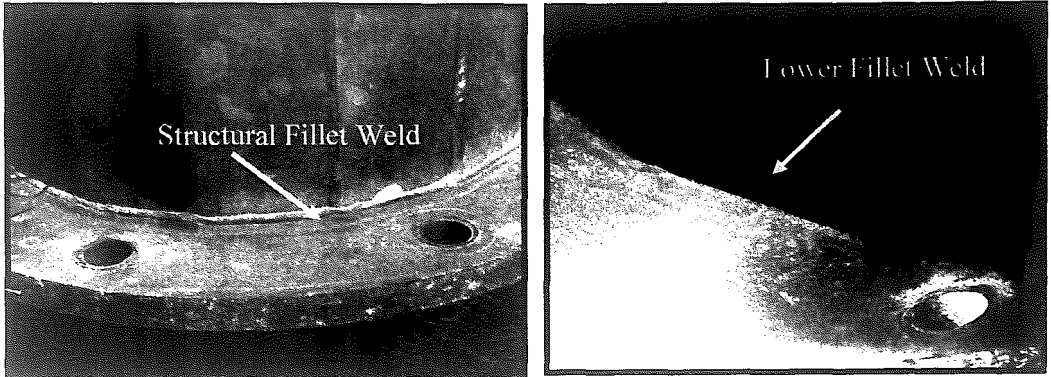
Socket Fillet Welds: Structural and Lower
